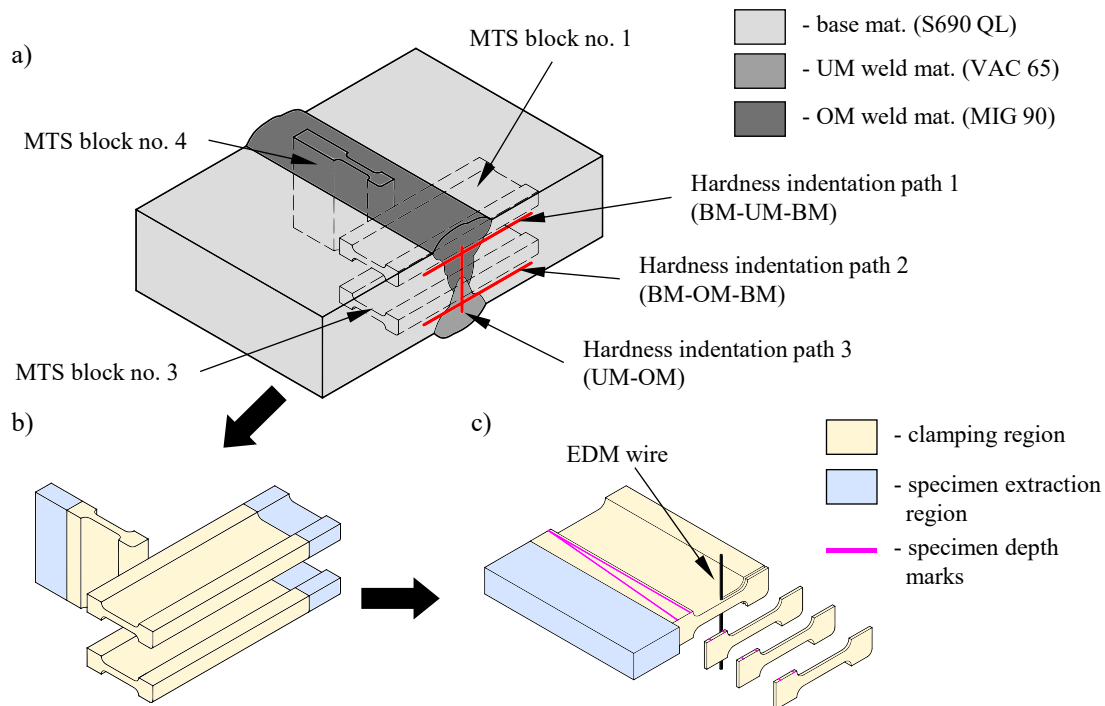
The process of the micro tensile specimens extraction; a) the part of a welded sample plate with a layout of the micro tensile specimens blocks and marked hardness measuring paths, b) extracted blocks and c) the cutting of the micro tensile specimens from the extracted blocks.
